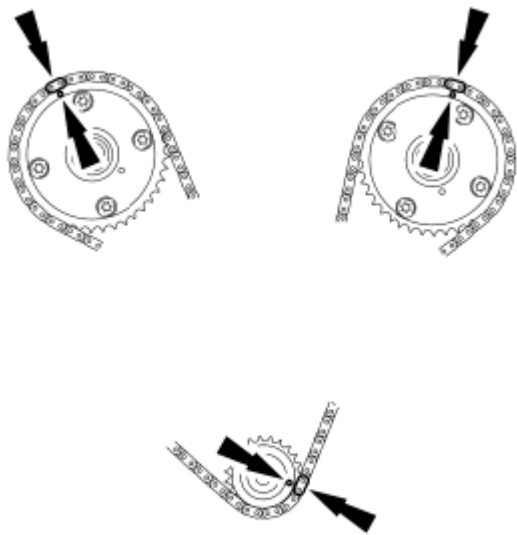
Locating Crankshaft Timing Chain Sprocket
